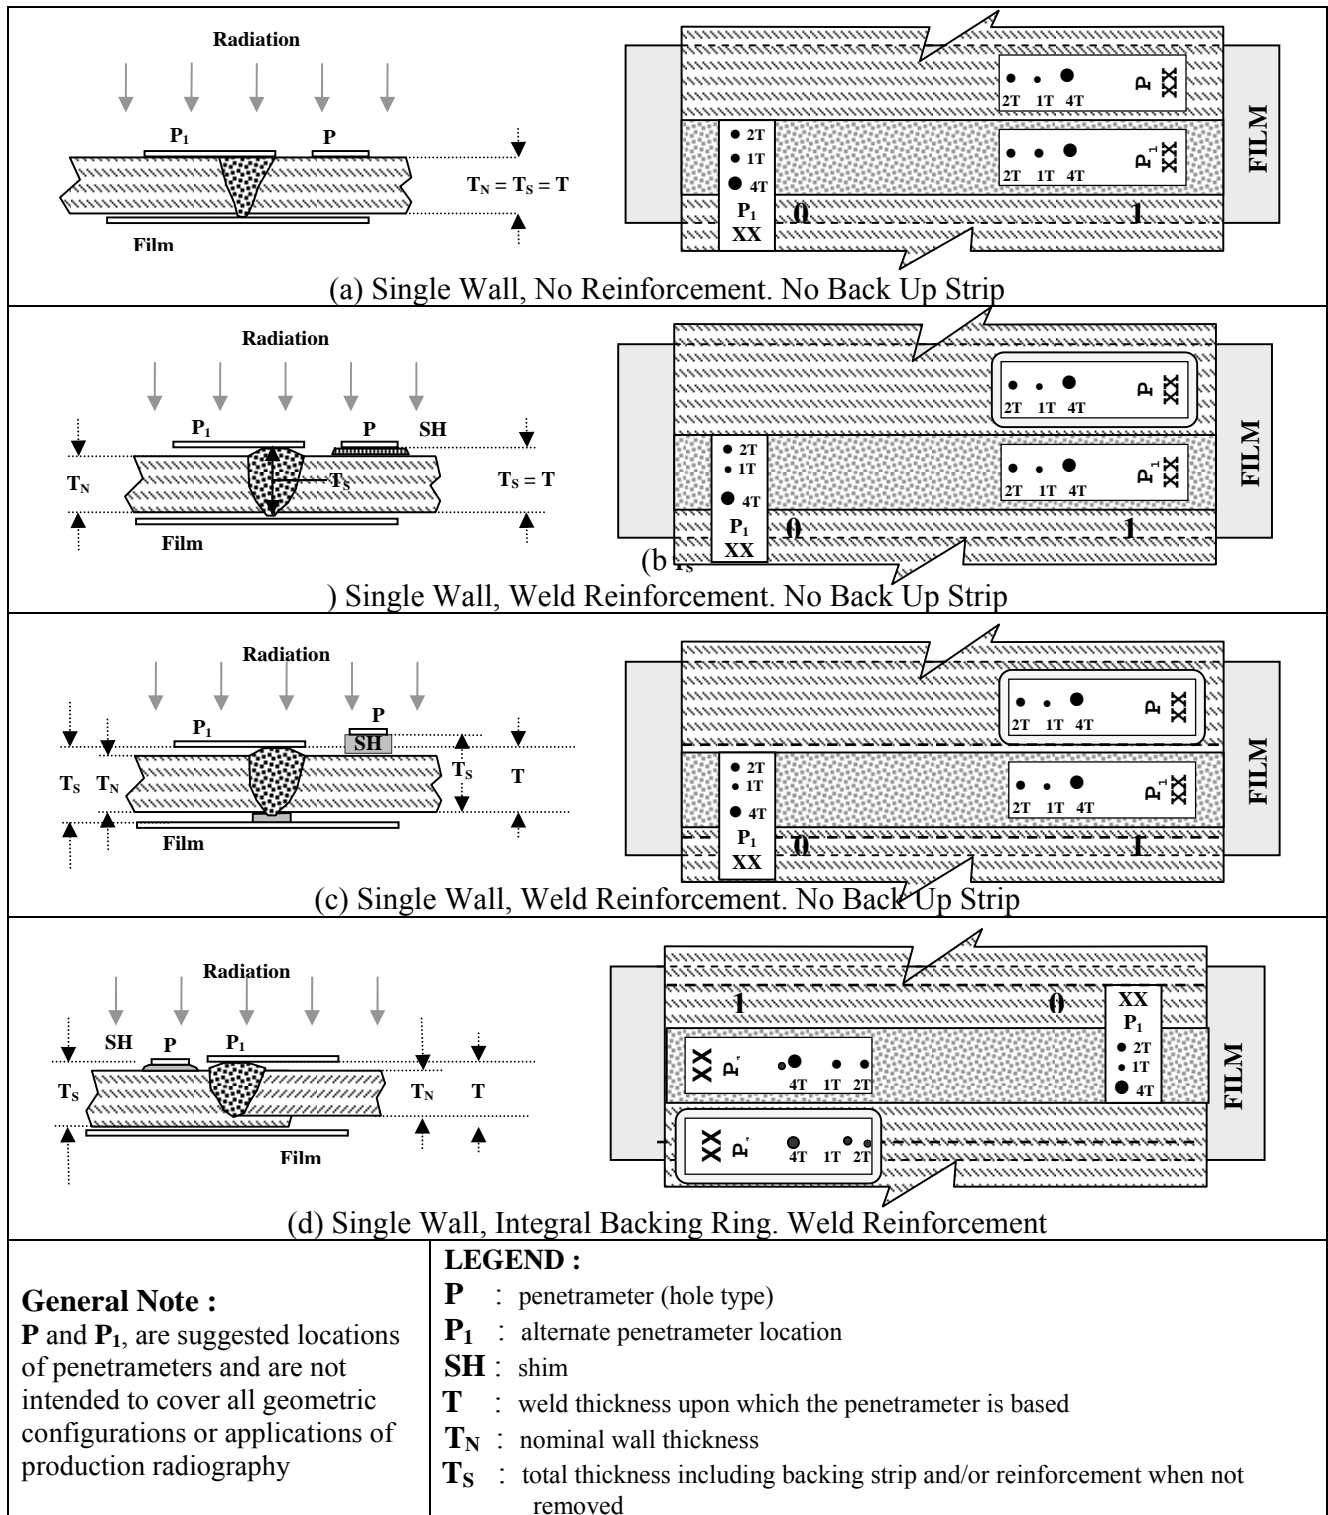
SIDE AND TOP VIEWS OF HOLE TYPE PENETRAMETER PLACEMENTS
